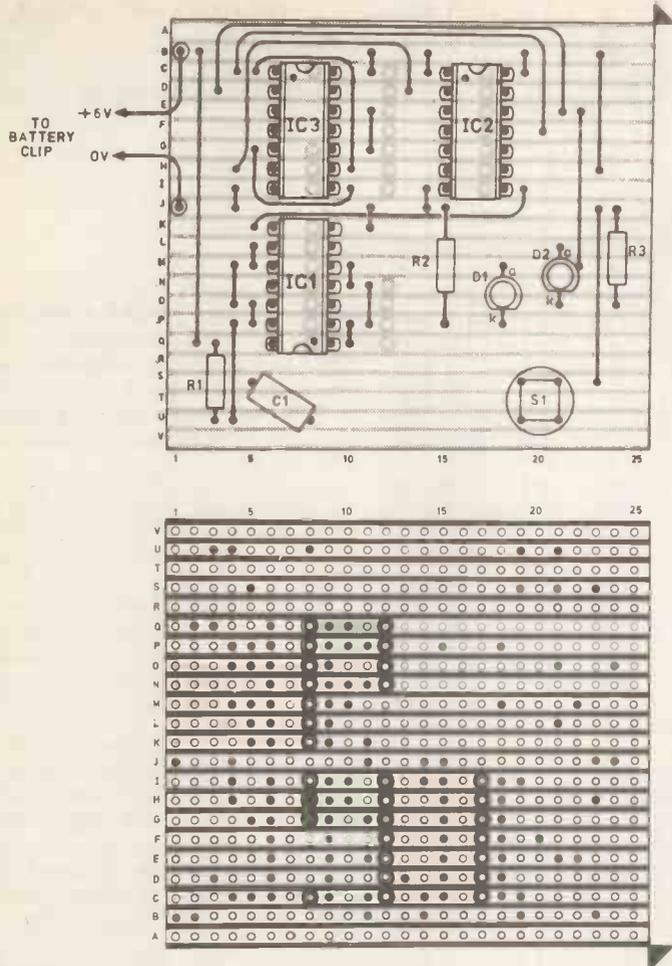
Stripboard component layout and underside view, showing breaks in the copper strips, for the Pseudo-random Head or Tails? Make sure that all link wires are correctly positioned.
